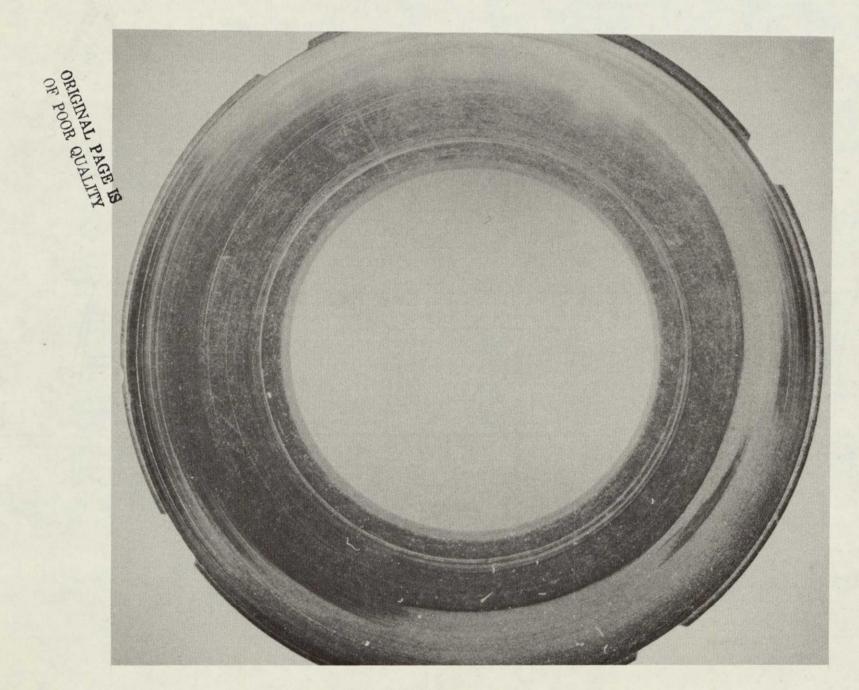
Spiral Groove LOX Seal Carbon Ring (P/N A28-0812-11, S/N 02, Posttest 111)
